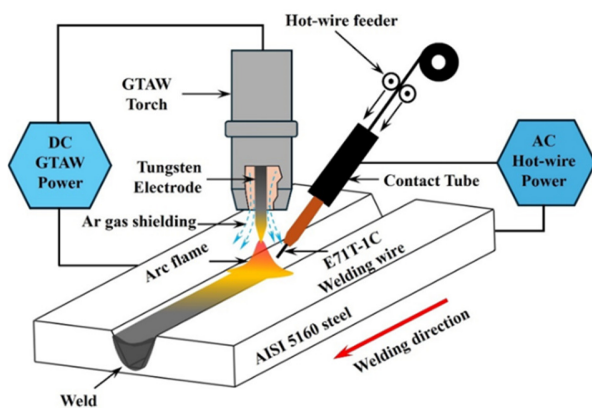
TIG hot-wire welding setup for AISI 5160 steel.
